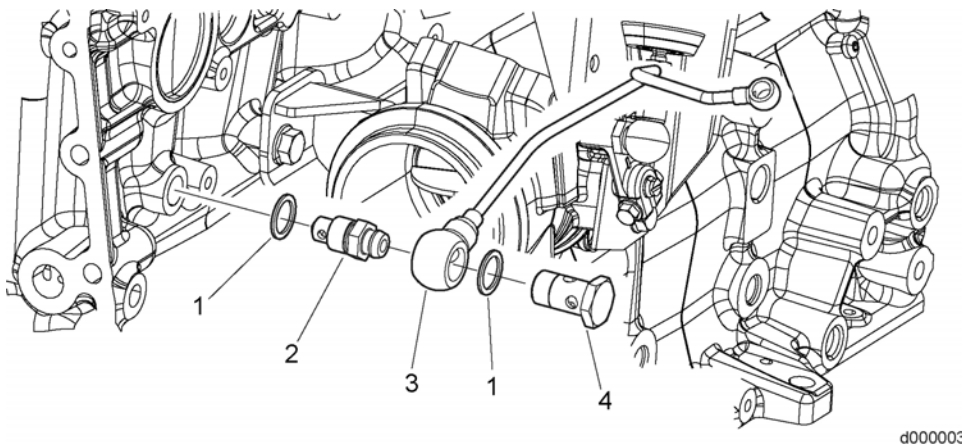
Dual-Stage Fuel Doser Valve Coolant Lines
